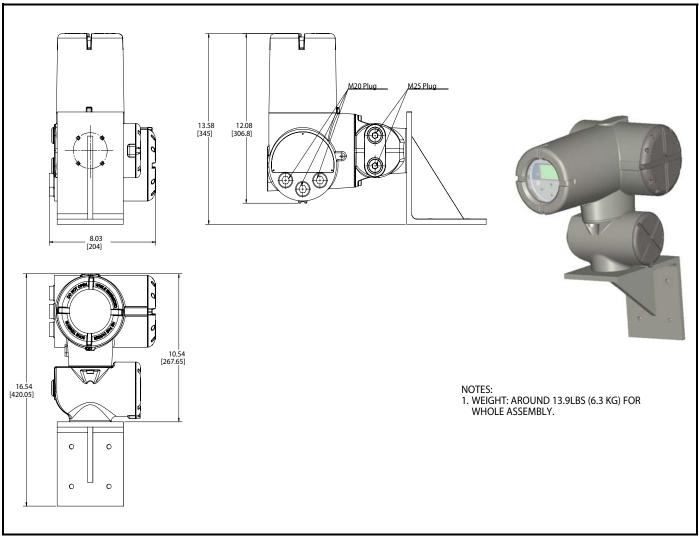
PanaFlow HT Electronics Package (dwg. 712-1795)
